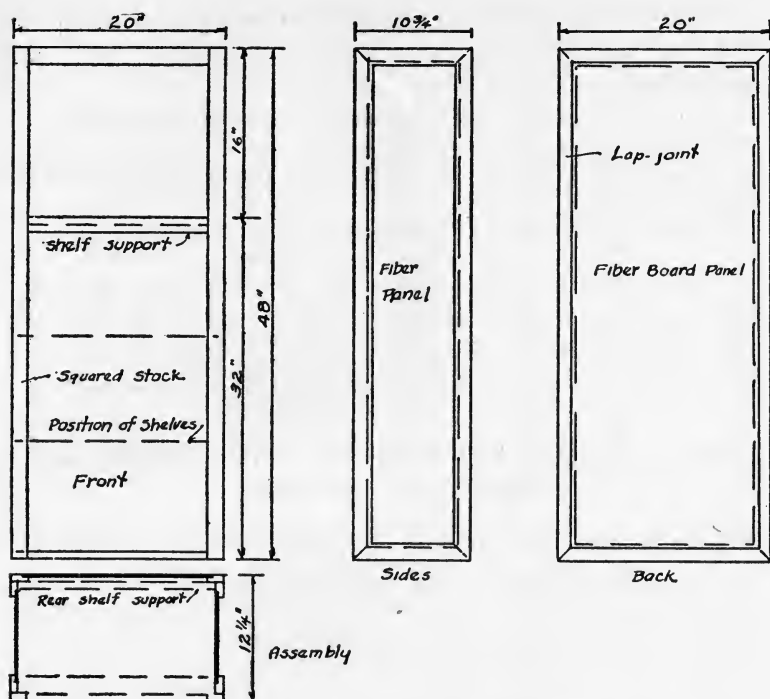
Construction details showing all measurements, parts and assembly to make a complete wall case 48" high, and one 20" unit wide.
